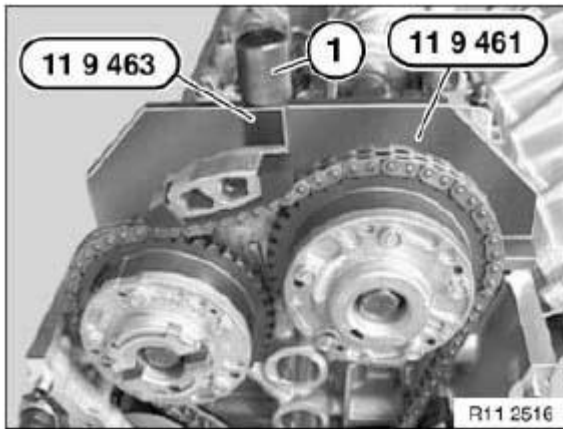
Identifying Special Tool (11 9 463) And (11 9 461)
